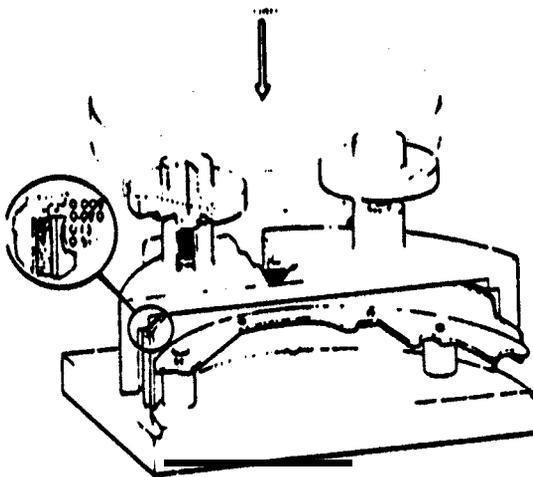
MINI PLANE SHEAR TEST—DRUM BRAKE
